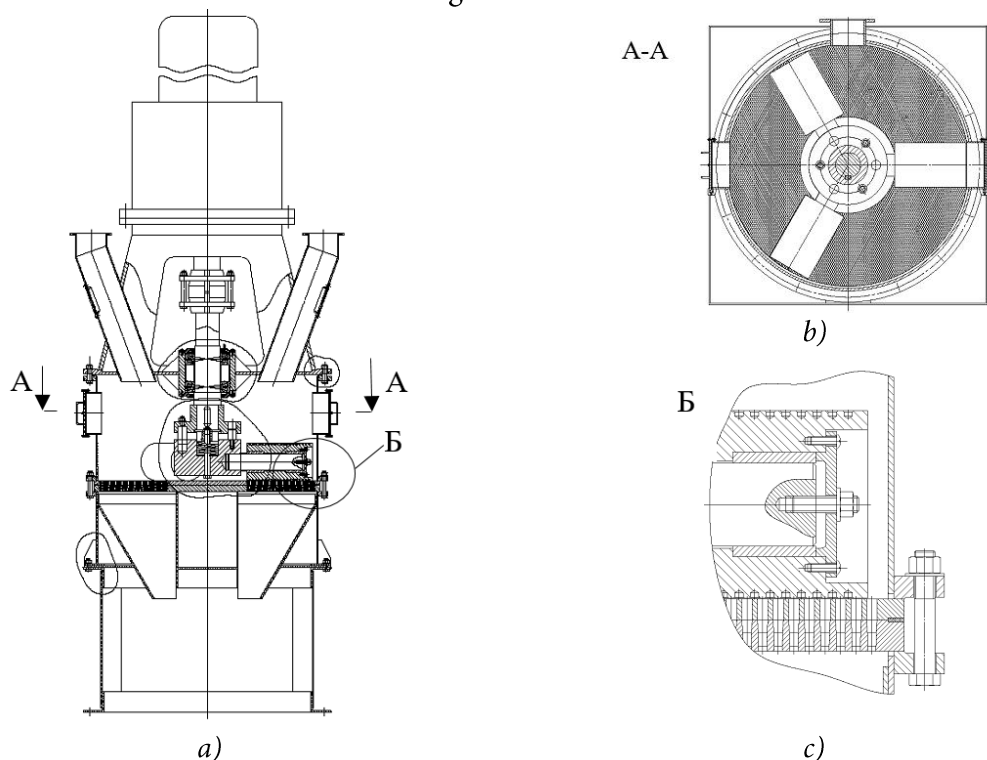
Diagram of a rotary granulator with a flat die: *a)* general view of the granulator; *b)* arrangement of the rolling rollers above the die; *c)* design of the flat die mounting in the housing
